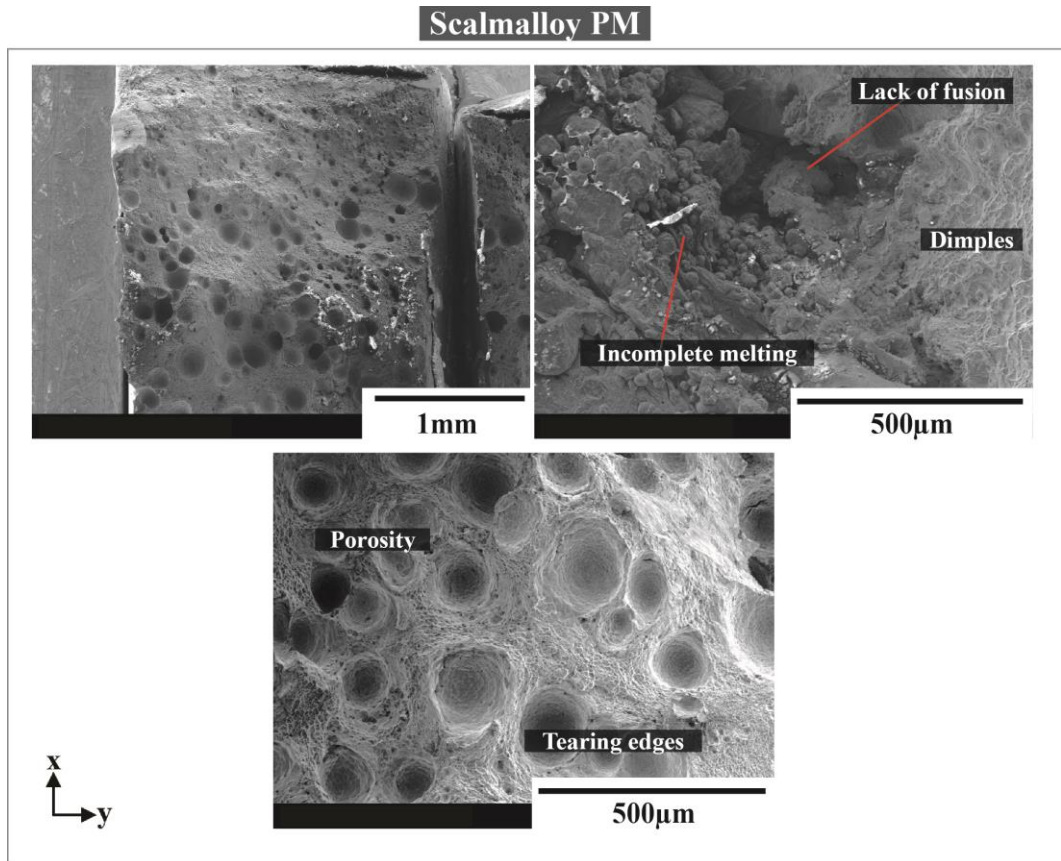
Fracture surfaces and fractured samples for Scalmalloy post machined welded joint
